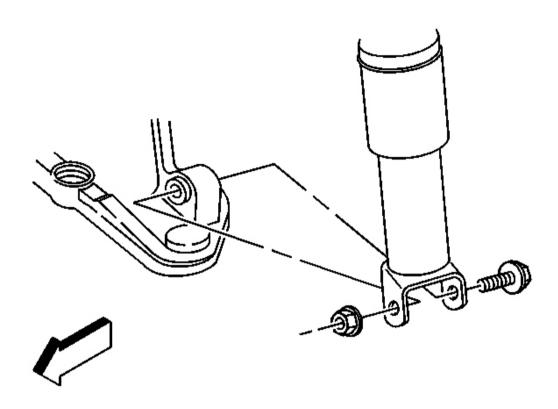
Mounting Shock Absorber To Control Arm Courtesy of GENERAL MOTORS CORP.
